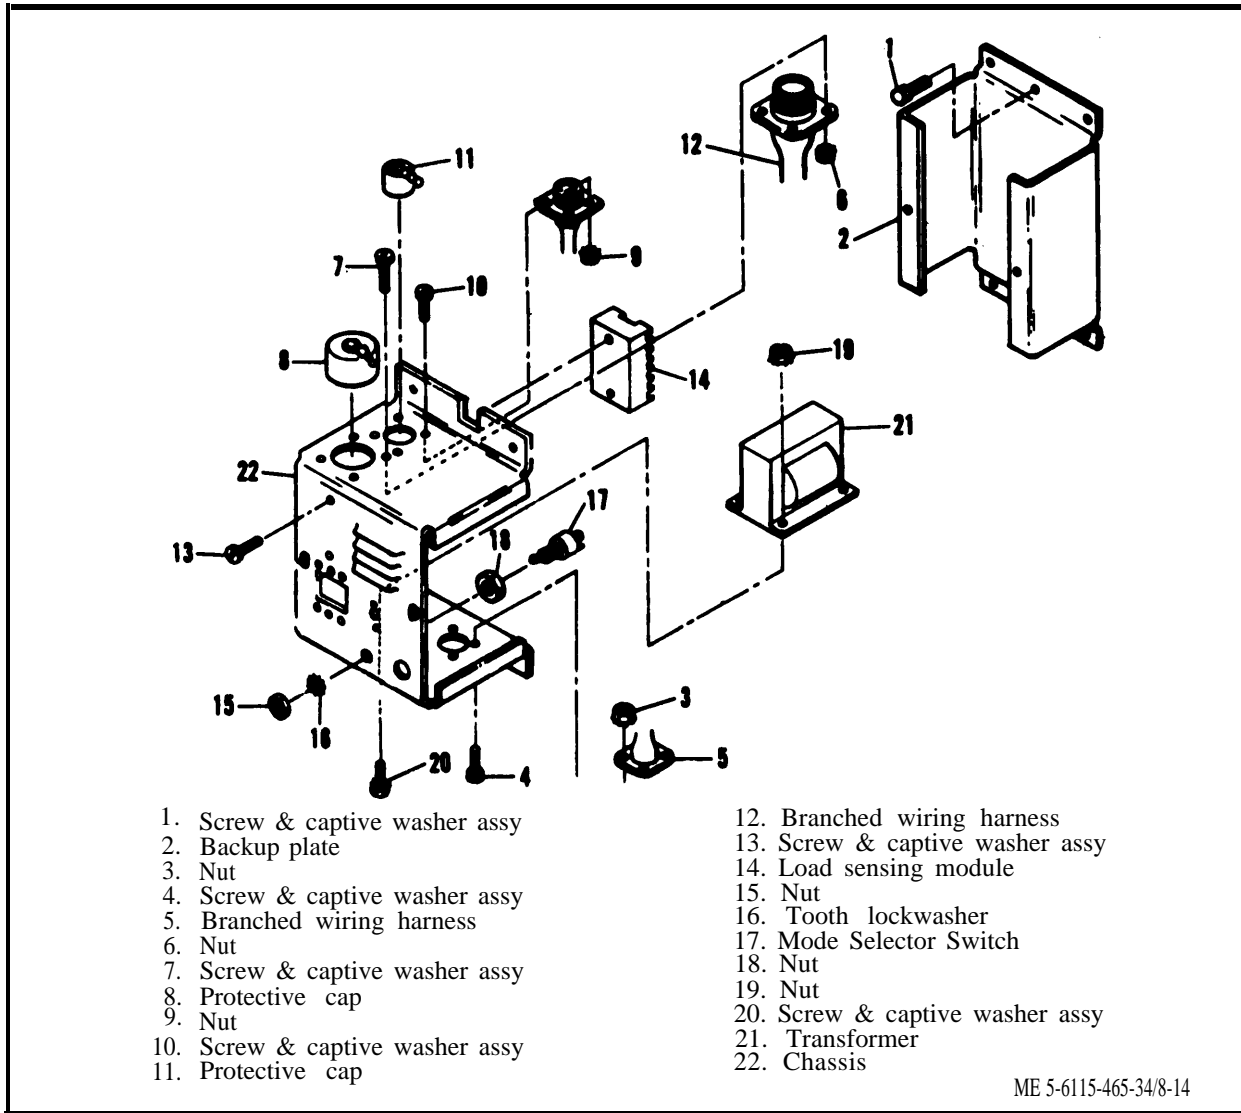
Load Bank Control Box Assembly, Exploded View
